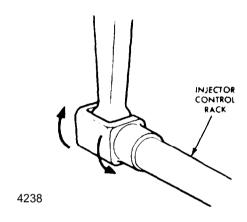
H-6. Checking Rotating Movement Of Injector Control Rack
